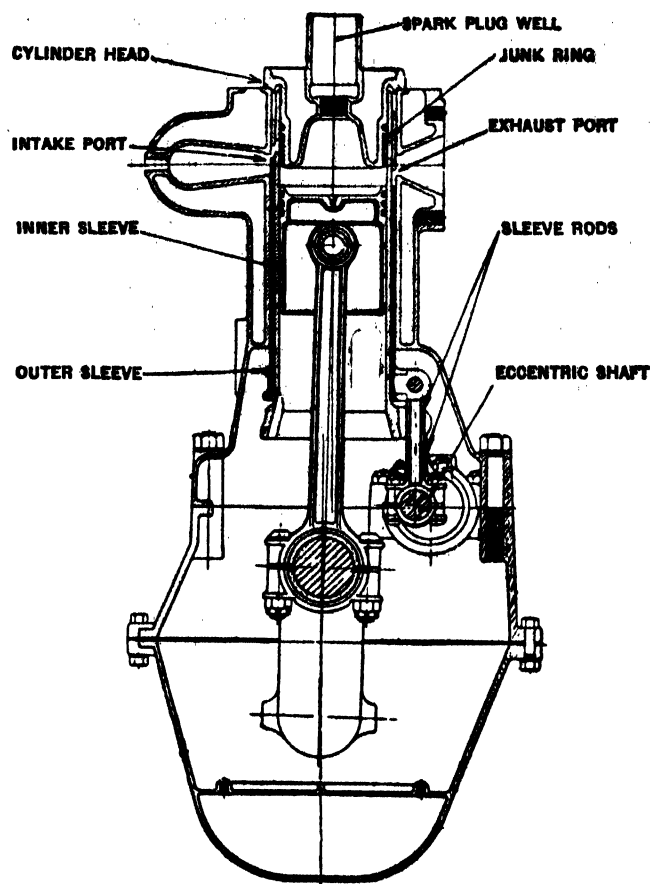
Section through cylinder of Knight sleeve-valve engine.
